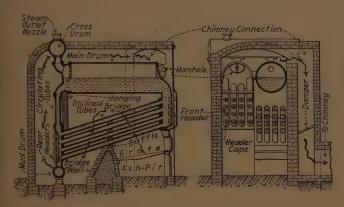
Early form of Babcock & Wilcox boiler (year 1870).
